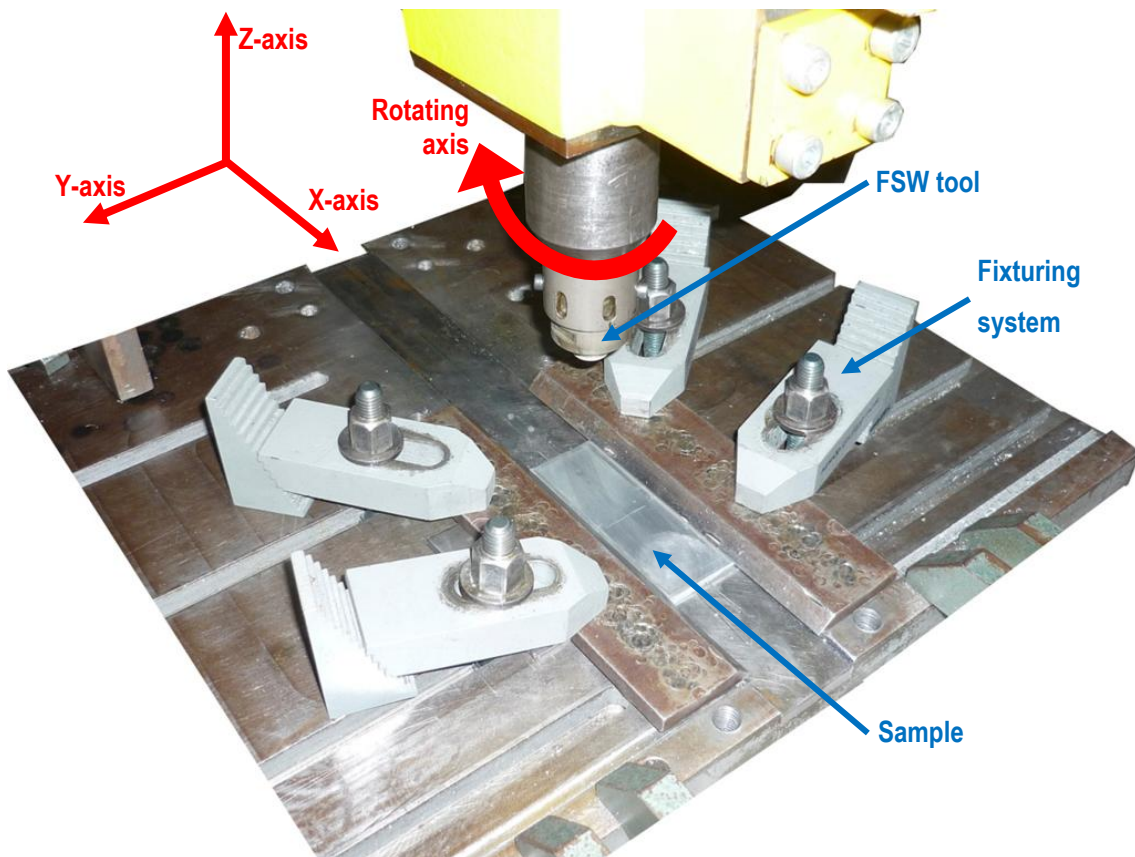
Sample set up and degrees of freedom in FSW machine.
